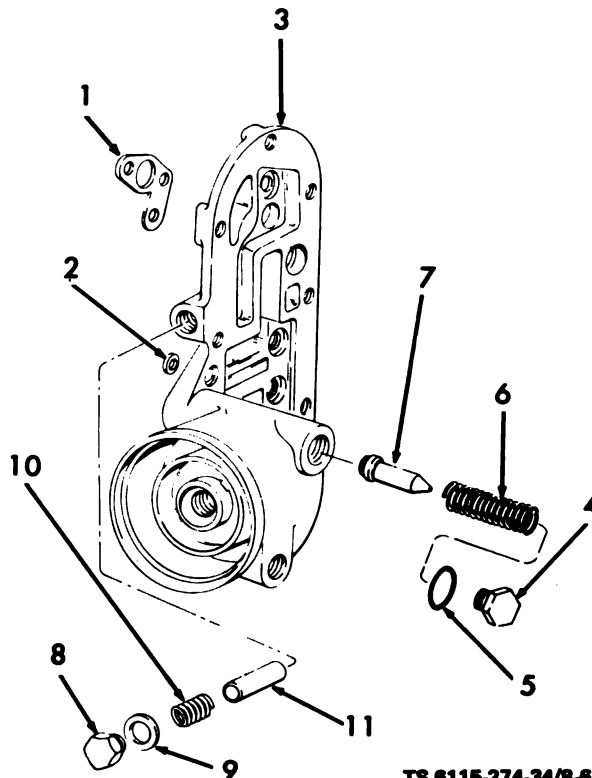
Oil Cooler and Filter Adapter, Disassembly and Reassembly
